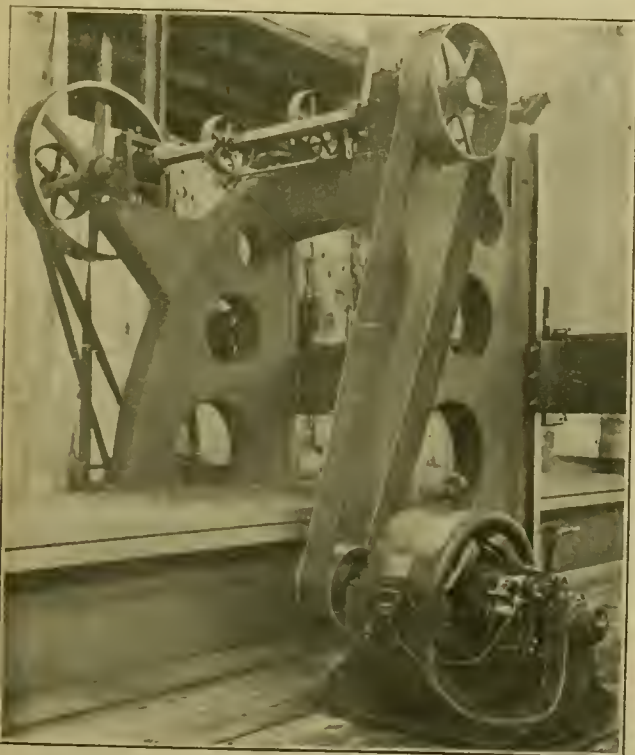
BELTED DRIVE UPON A PLANER BUILT BY THE BETTS MACHINE COMPANY, SHOWING USE OF FLYWHEEL.
